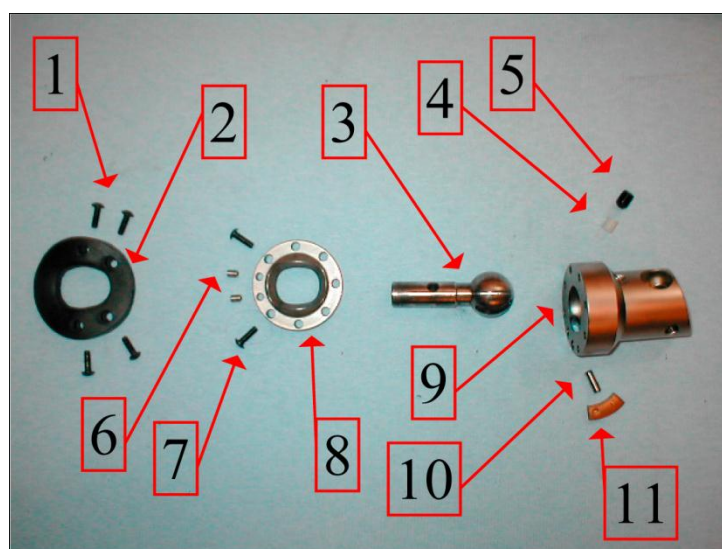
ANKLE ASSEMBLY, EXPLODED VIEW
